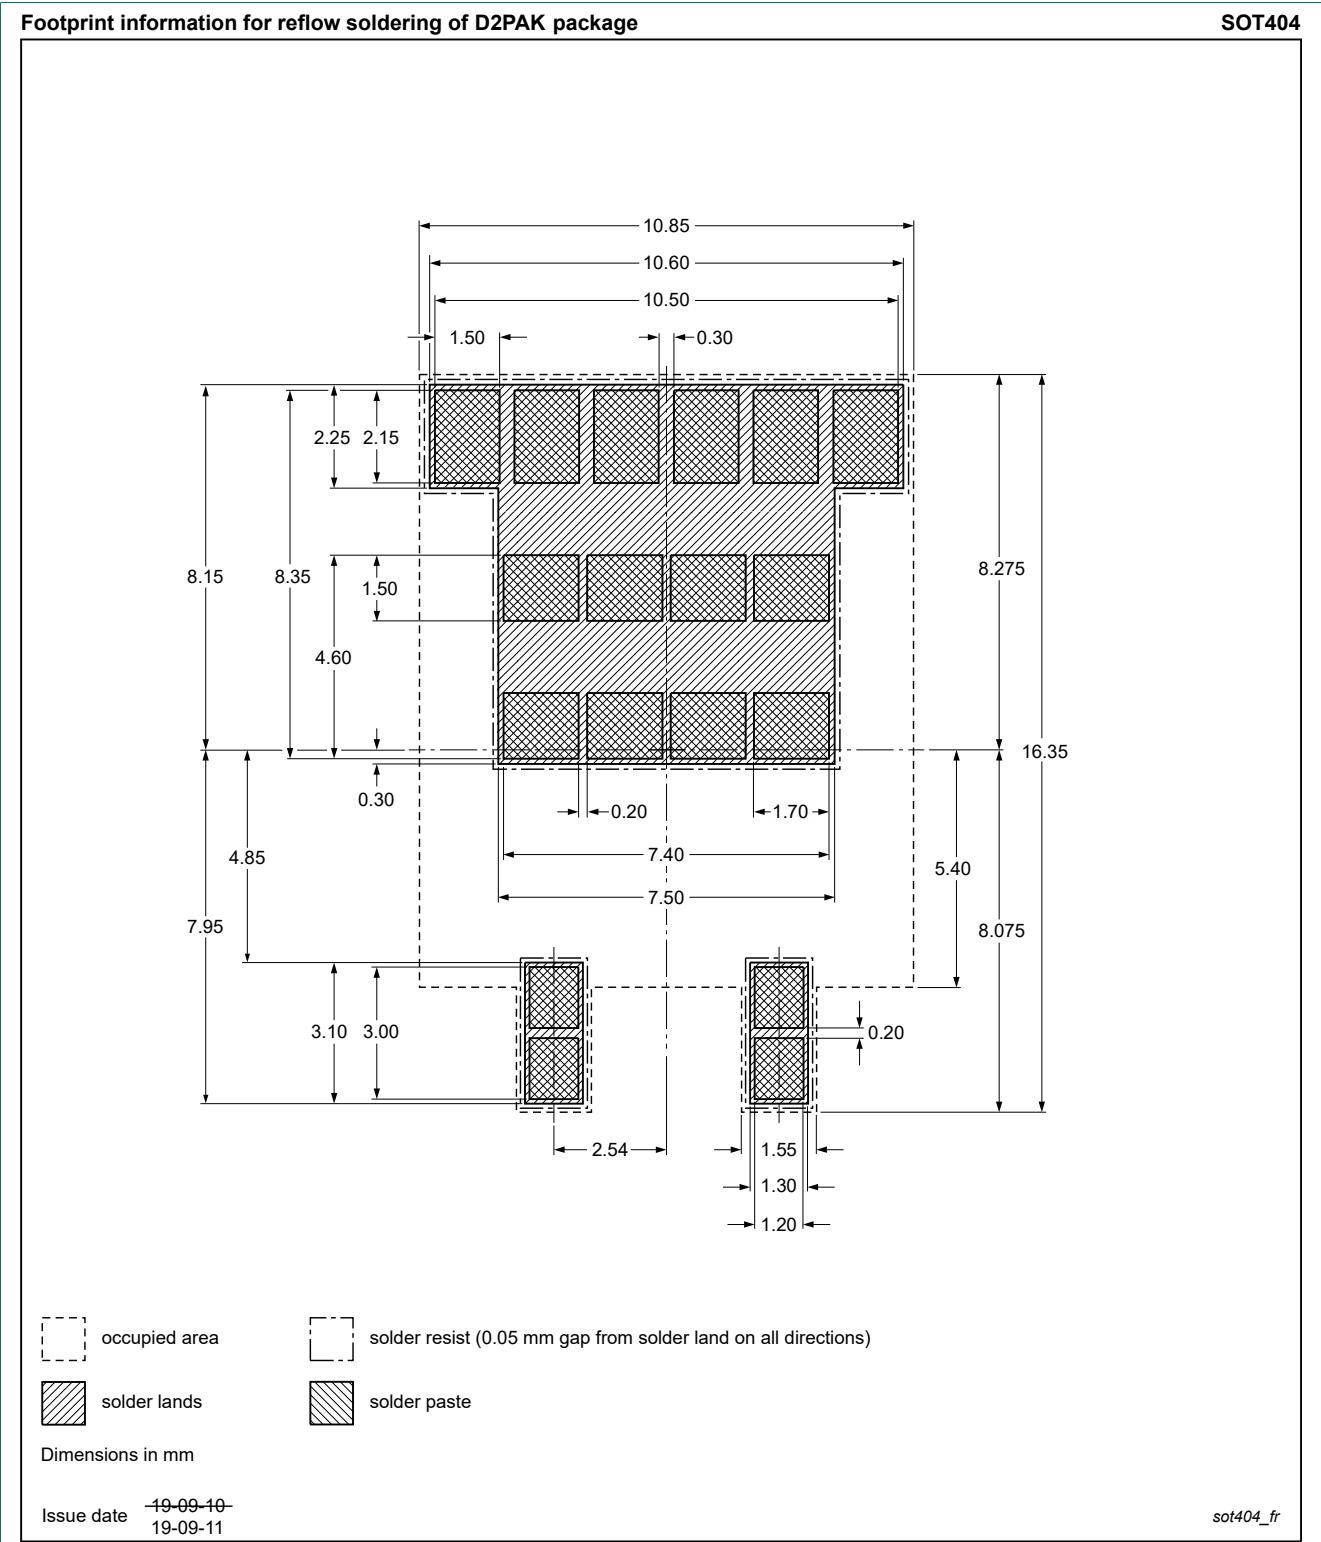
Reflow soldering footprint for D2PAK (SOT404)
